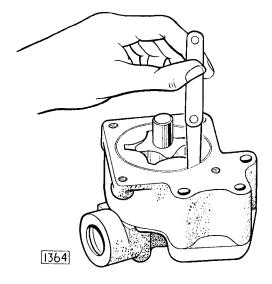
Measuring the clearance between the outer rotor and the pump body.
